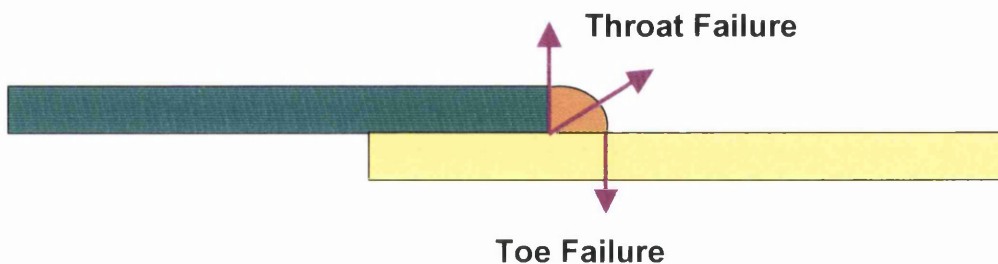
Traditional Failure Locations in Welded Structures
